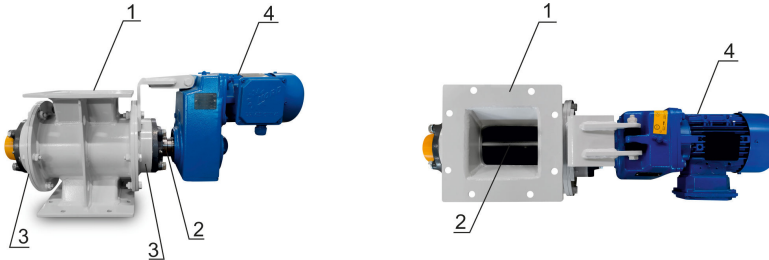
Diagram of the BKR150 feeder: 1 – body, 2 – rotor assembly, 3 – side lids, 4 – gear-motor.
